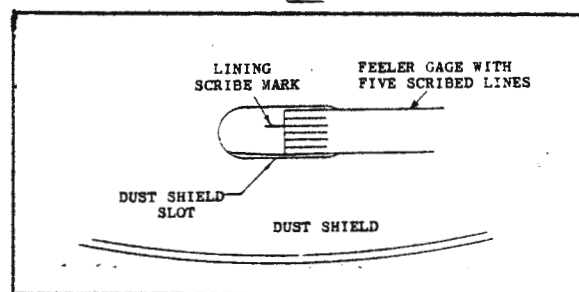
Measurement Gauge and Lining Scribe Mark
